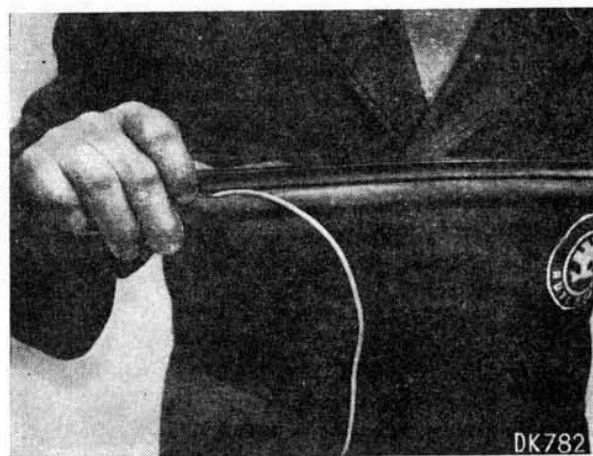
/2 - Inserting a Twine into the Groove of the Glazing Rubber Moulding
